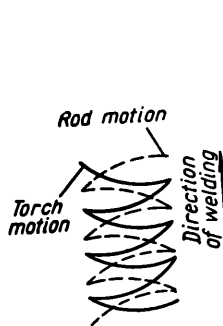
Motions of the torch and welding rod on metal thickness over 3 mm
